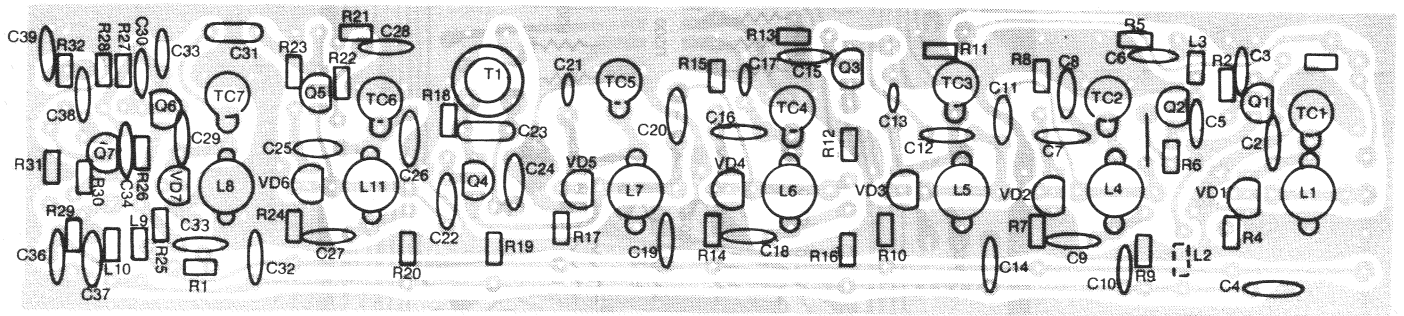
Front End Module Component Board Layout; #Q42465J6
